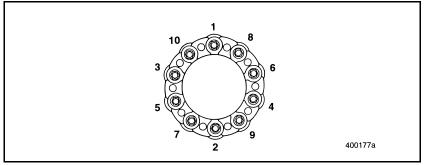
Wheel Nut Tightening Sequence with Chain Clearance Spacers
